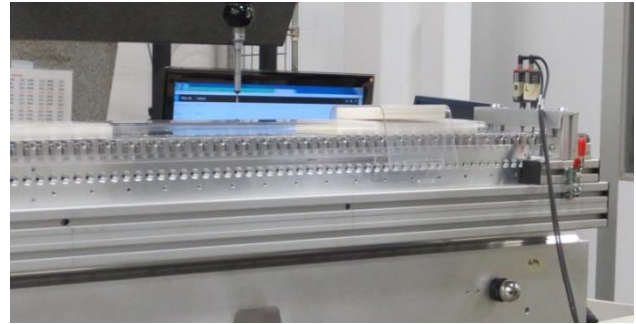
Magnet modules on CMM while attached to strongback. Shown with the two contact sensor fixture.
